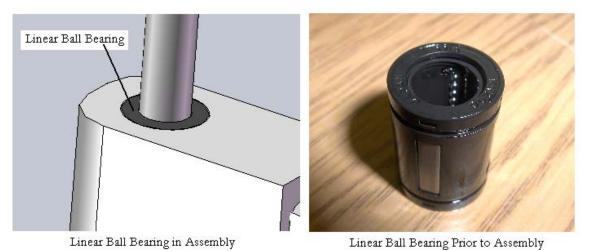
Linear ball bearing shown in assembly and prior to assembly.
